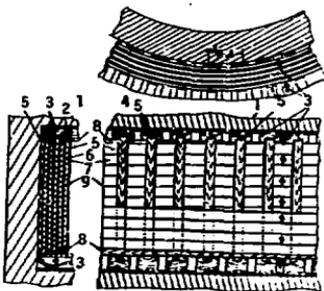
Coil matrix. 1) Bobbin, stainless steel, Type 304. 2) Bobbin flange insulator, NEMA G-10. Alternate grooves for helium admission and layer-to-layer insulators are provided in these pieces. 3) Helium passages, including those in item 2 and item 5. 4) Groove; positions insulator (item 5) at a center-to-center dimension of 3 cm at the coil inside diameter. 5) Layer-to-layer insulator, 12 mm thick x 95 mm wide, made of NEMA G-10. It also creates a channel between conductor layers for helium flow. 6) Superconductor, Ti-Nb. 7) Conductor (stabilizer) Cu OFHC grade. 8) Helix angle wedge, NEMA G-10. 9) Turn-to-turn insulator, NOMEX type 410, .25 mm thick, is glued to one edge of the conductor. NOMEX is an aramid paper made by DuPont.
